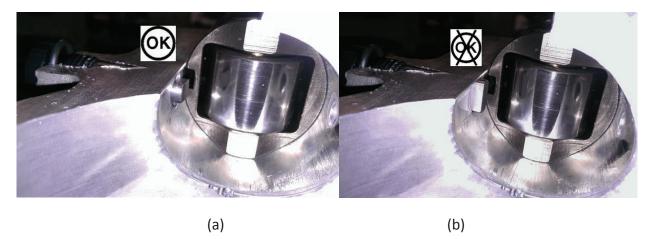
Bottom view using cut-away cam housing. (a) Tappet guide pin correctly oriented within the bore. (b) Tappet guide pin incorrectly oriented within the bore.
